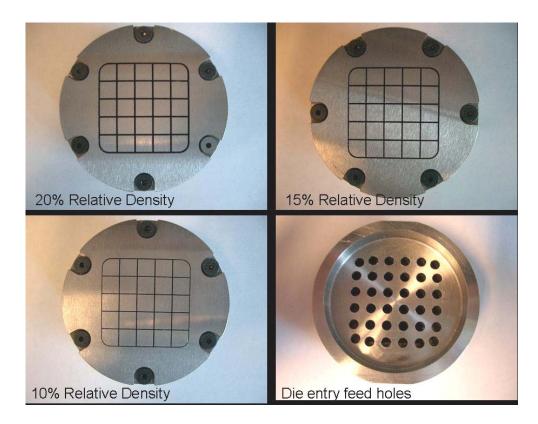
Photos of final square cell honeycomb extrusion dies with dimensions are as specified in Table 1.
